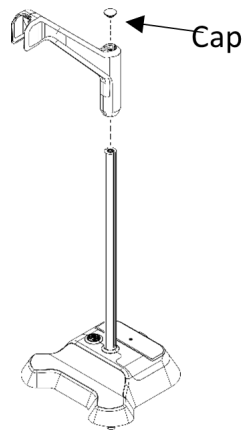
Assembly of the Aquanex Touch Smart Dispenser
